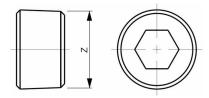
Internal drive pipe plug with conical thread DIN 906
